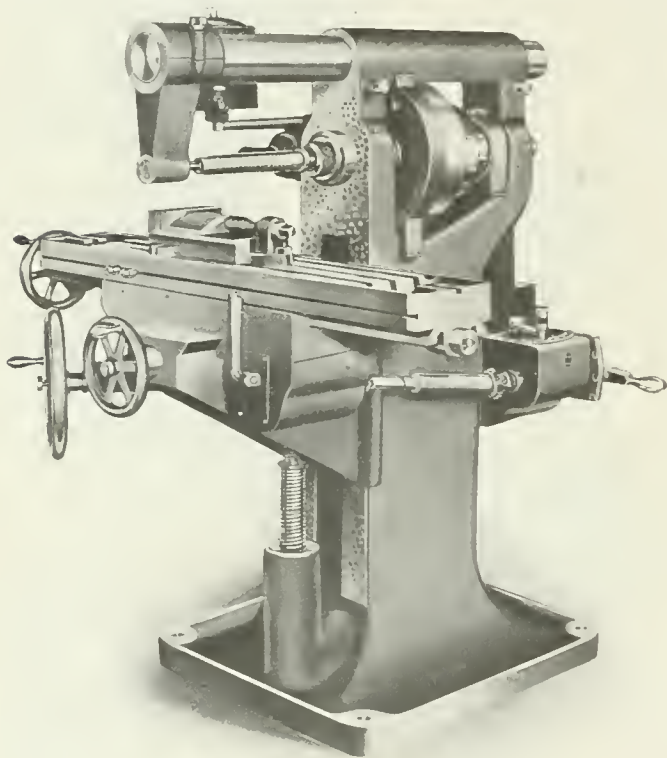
Plain Milling Machine built by the Grand Rapids Machine Tool Co.
